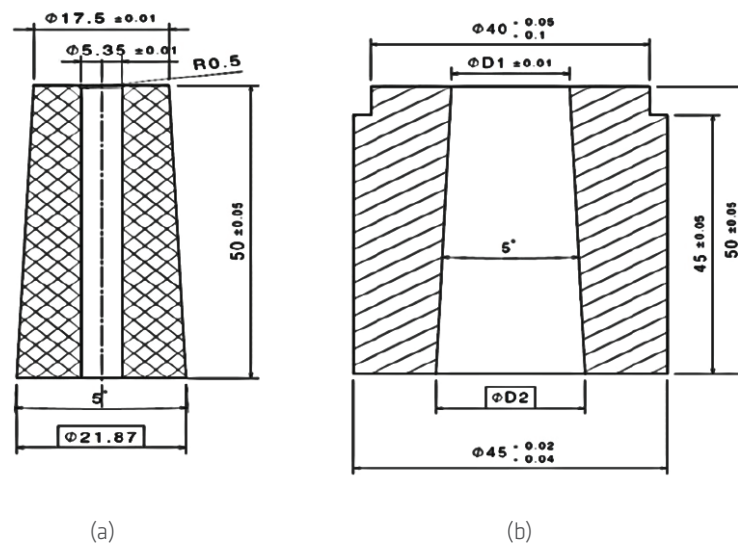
Technical drawings of (a) die insert and (b) stress ring of 4th station heading die.
